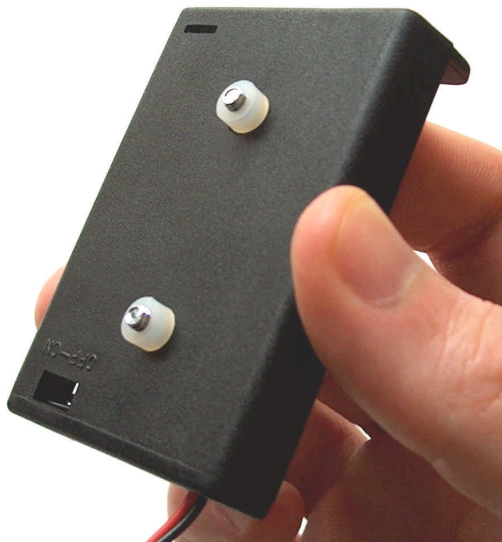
Hold the flat-head screws in place and put spacers over screw-ends
